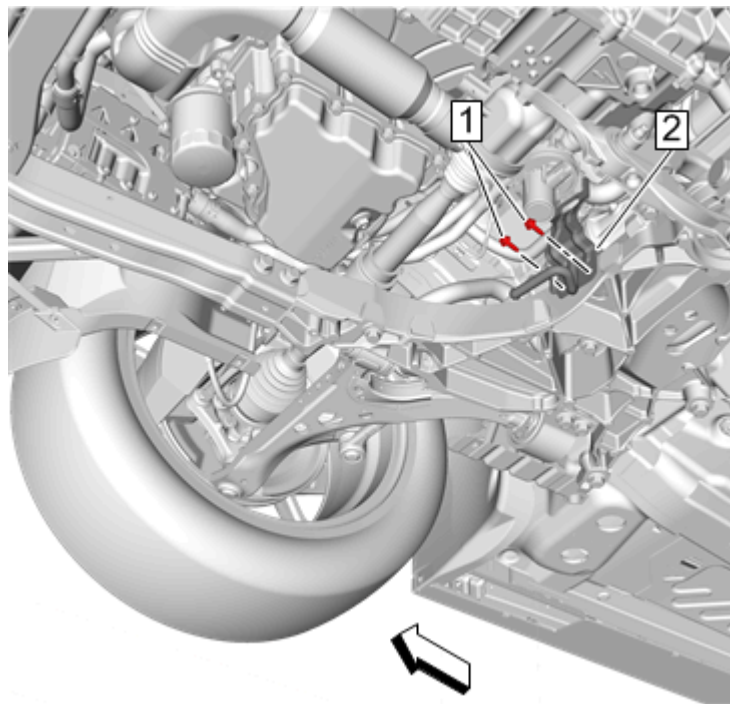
Heater Water Bypass Valve Bracket Bolt And Heater Water Bypass Valve Bracket
